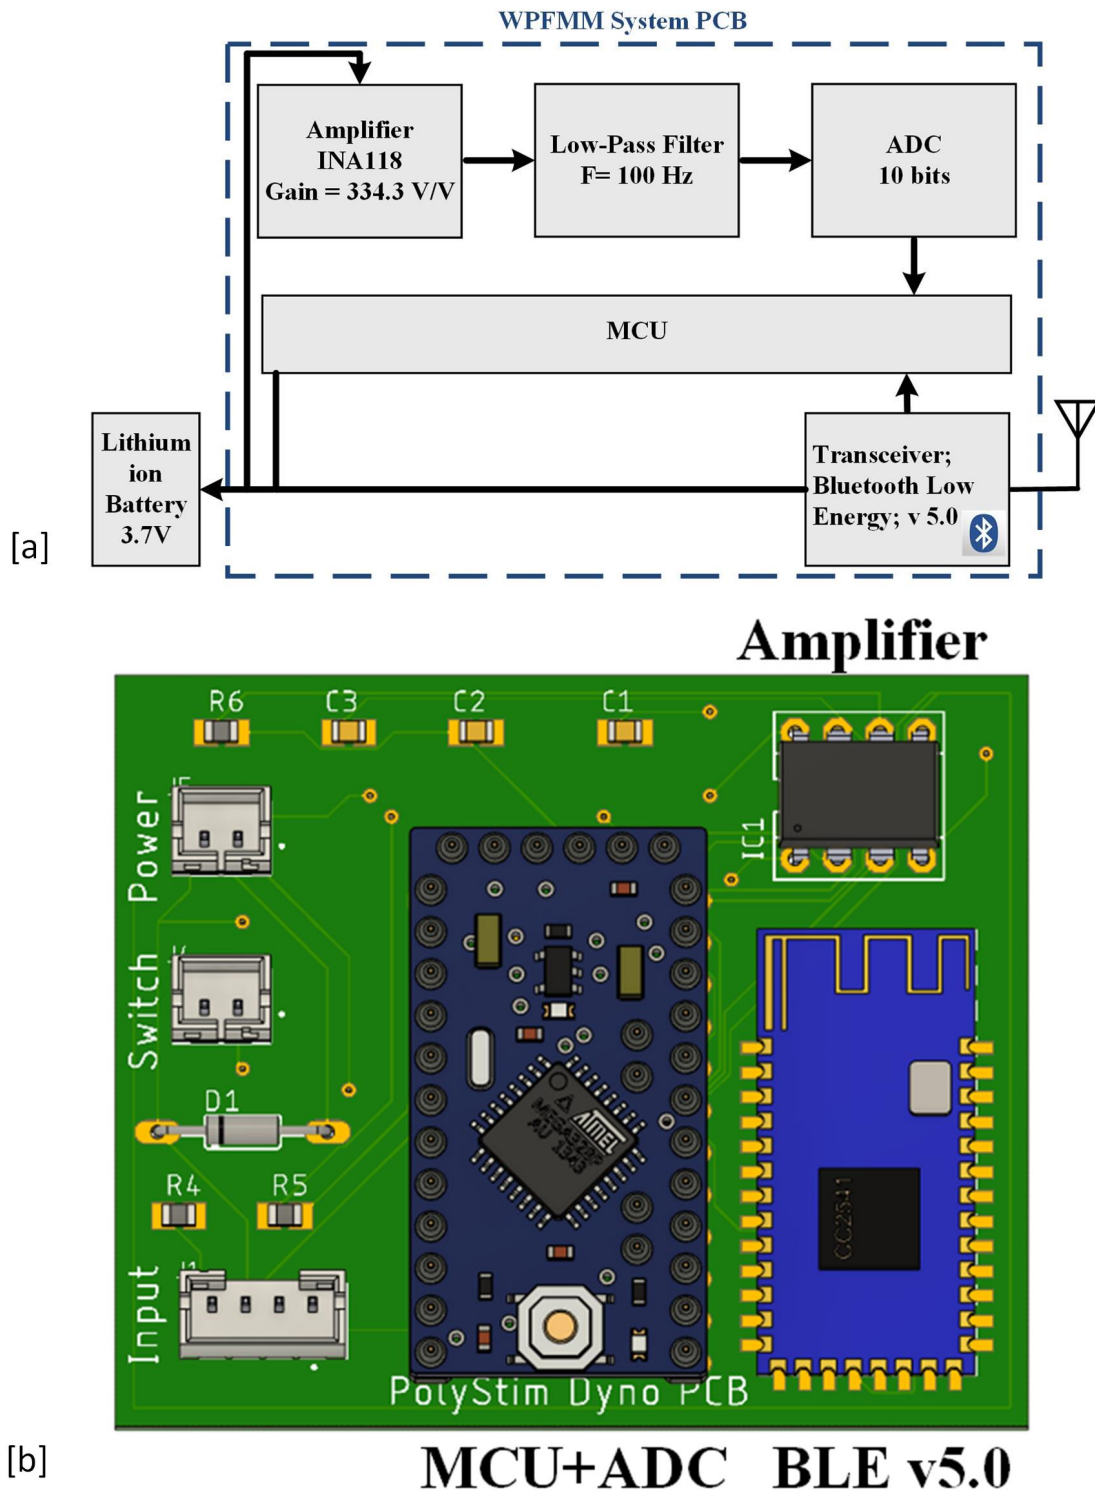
Processing unit for the proposed WPFMM system (a) Block diagram, and (b) Designed PCB.
